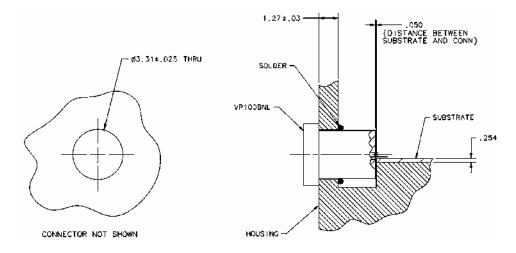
VP100CNL Mounting Hole Dimensions and Assembly Drawing for Thin-wall housing
